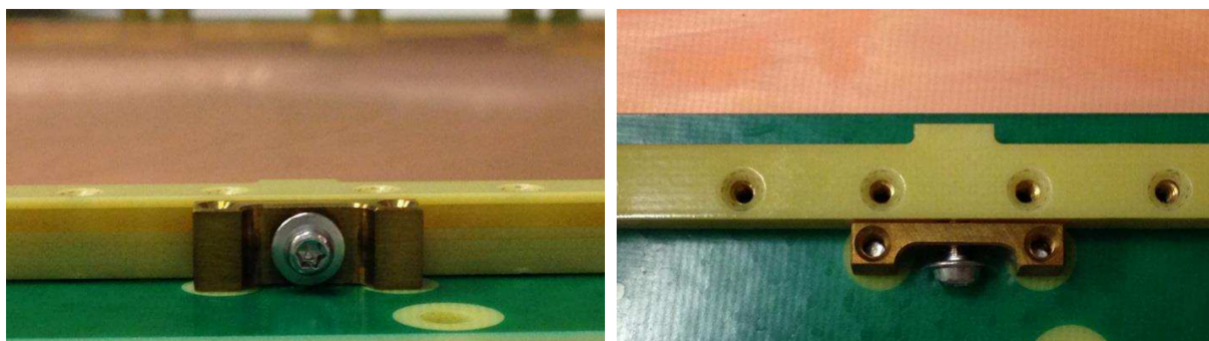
Brass pull-out with screw inserted into inner frame for tensioning the GEM foils in the stack in side view on the left side and top view on the right side.
